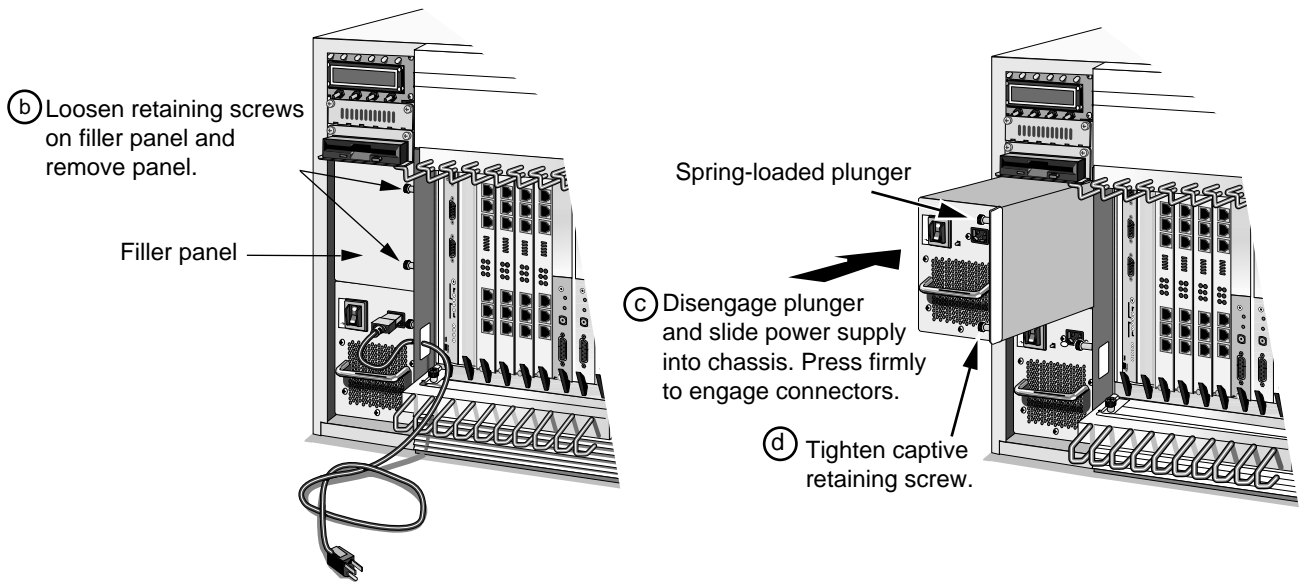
Installing a Second Power Supply in the Extended Chassis
